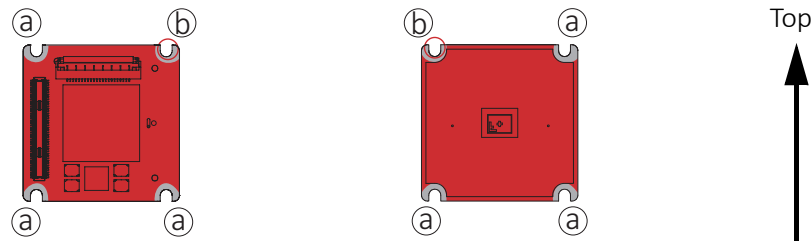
Mounting area of Alvium CSI-2 bare board cameras connector side (left); sensor side (right)
